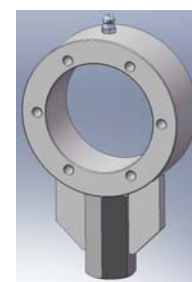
pumprod bearing housing, weight: approx. 0,9kg
